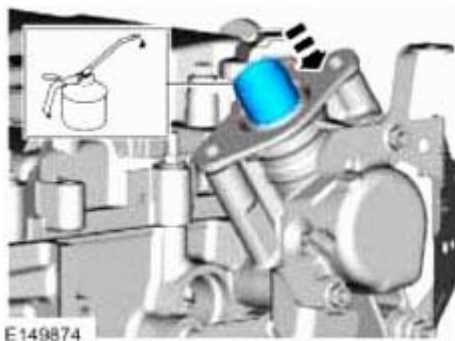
Lubricating Fuel Injection Pump Roller Tappet
